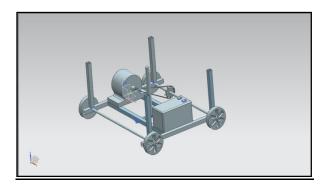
Drafting Sheet of Mechanism (Drawn in NX-CADD)
